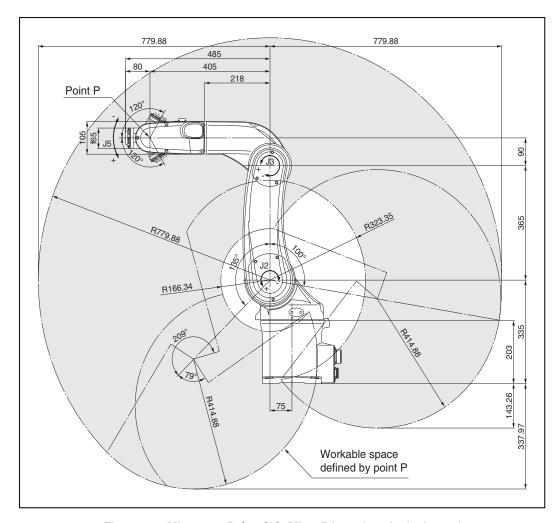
Viper 850 Robot Side View Dimensions (units in mm)
